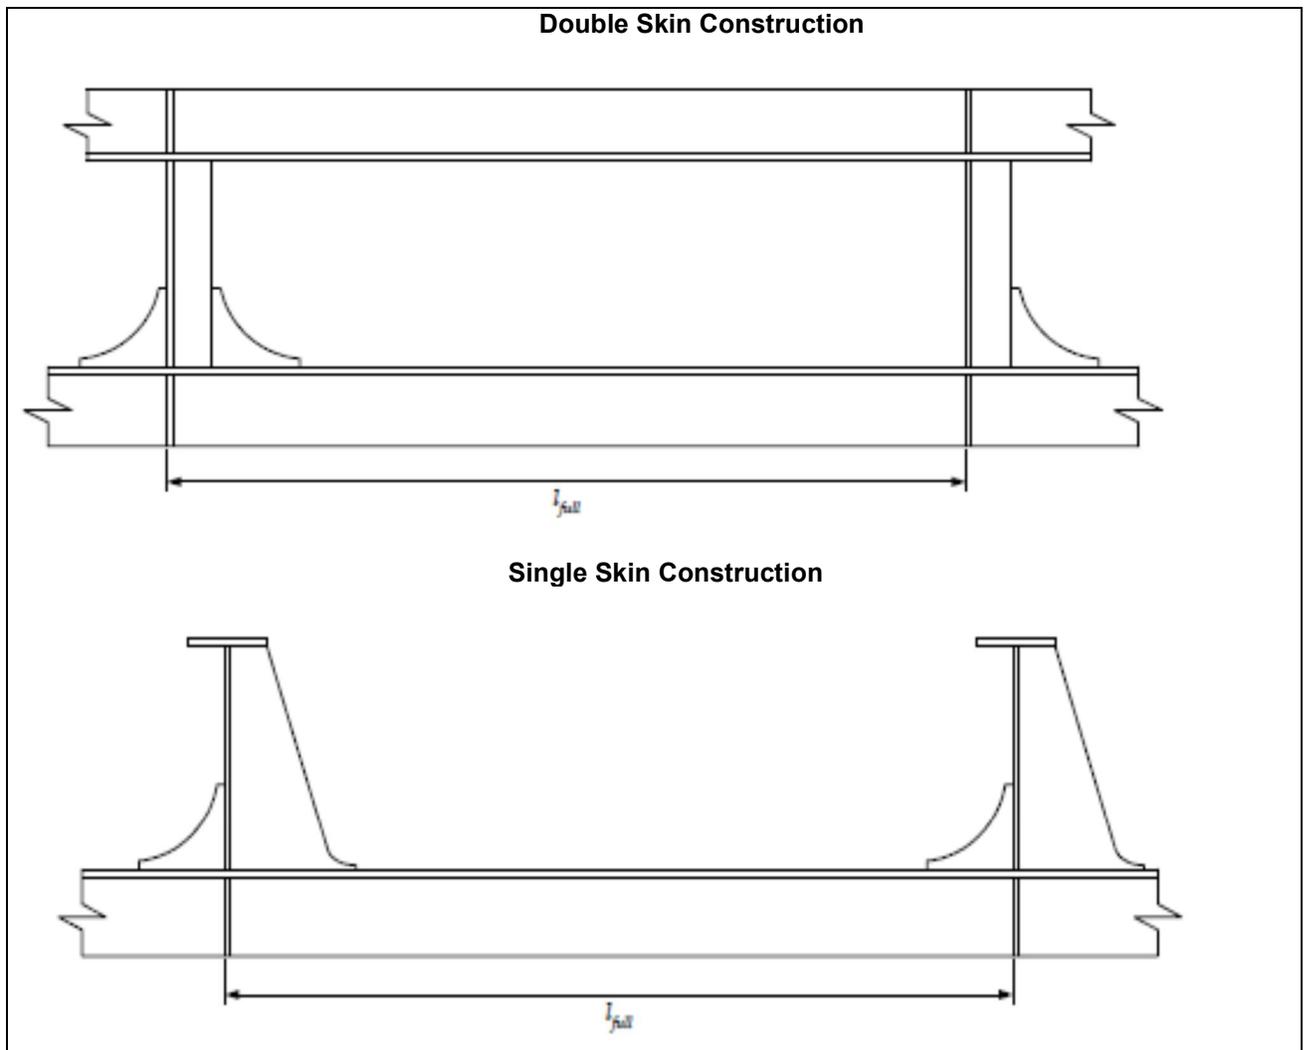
Definition of Overall Span of Stiffeners, l_{full}
